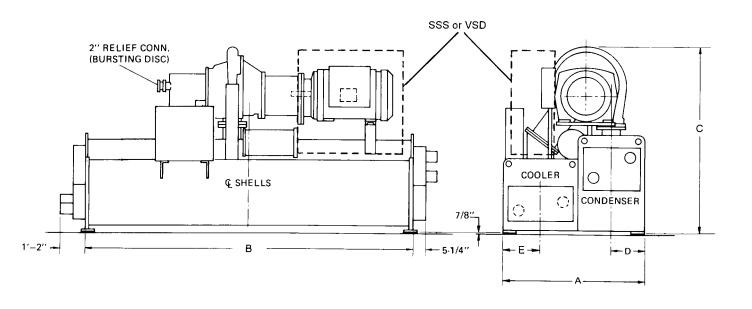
OVERALL DIMENSIONS AND SERVICE CLEARANCES
